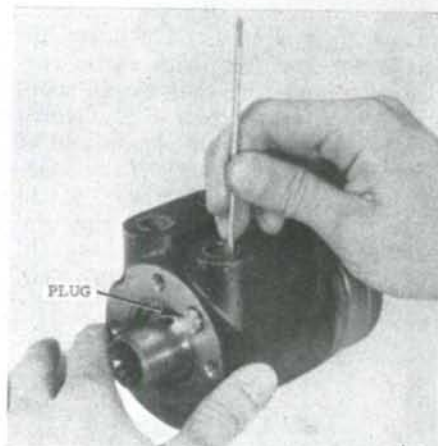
Use a brass welding rod with a 90° bend in one end to form a leg about 8 mm (5/16 inch) long to push check valve plug from valve body as shown.
